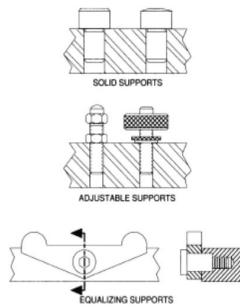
Solid, adjustable, and equalizing supports locate a workpiece from a flat surface.
